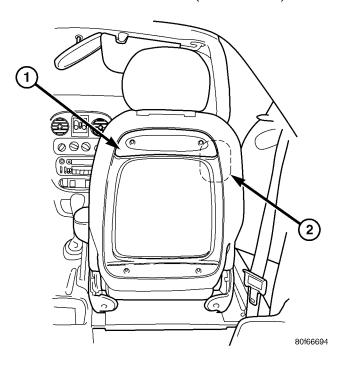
PT AIRBAG EQUIPPED FRONT SEATS
